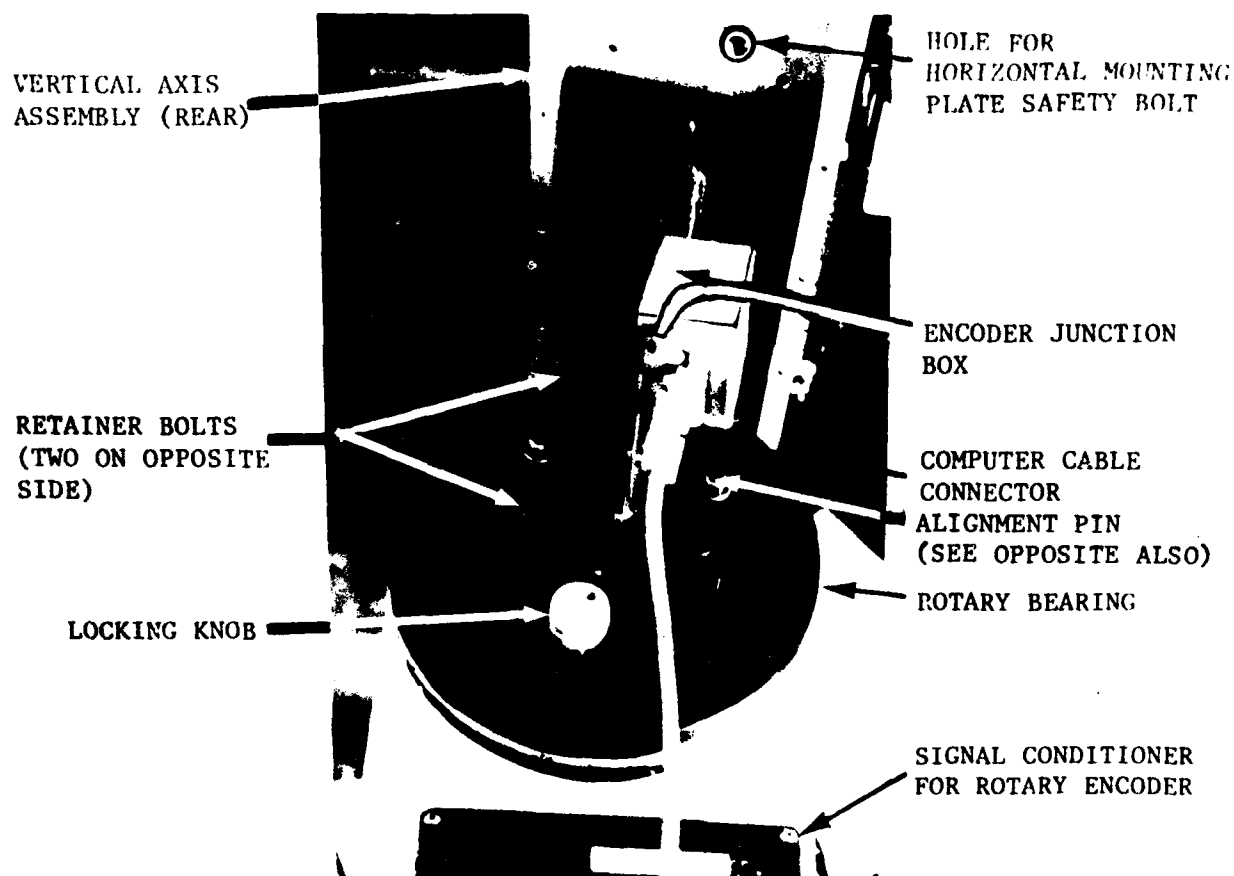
The rotary bearing and the back of the vertical axis assembly viewed from above and behind.
